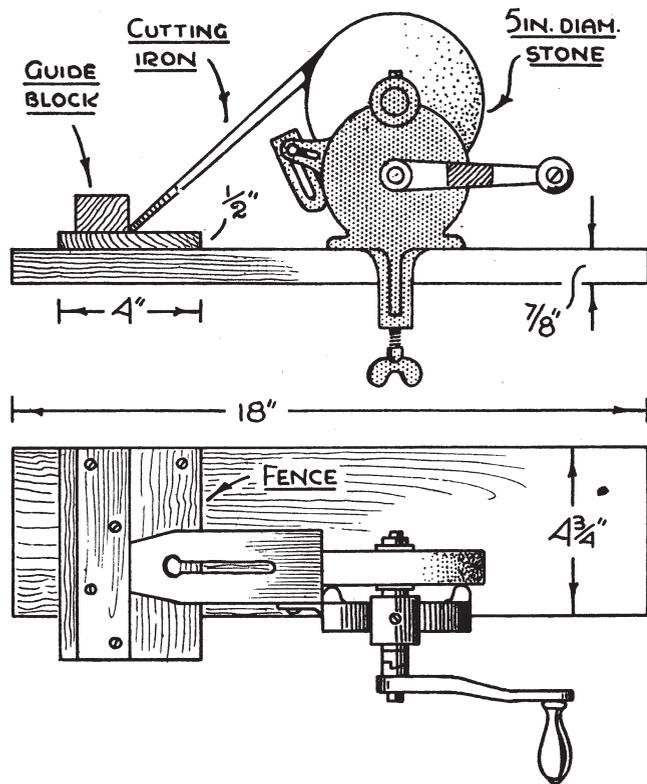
ELEVATION AND PLAN SHOWING GRINDING OF A PLANE IRON
